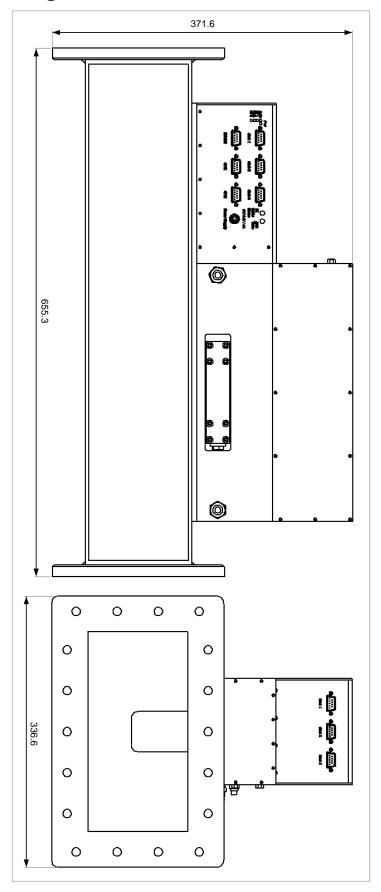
Basic dimensions of STHT 2.3. All dimensions are in millimeters.
